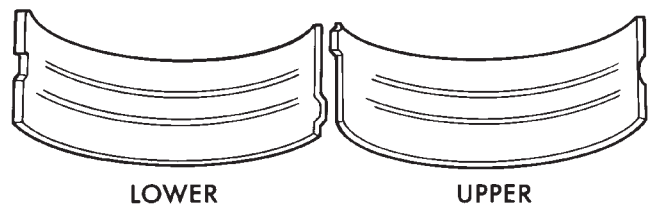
Scoring Caused by Insufficient Lubrication or by Damaged Crankshaft Pin Journal
